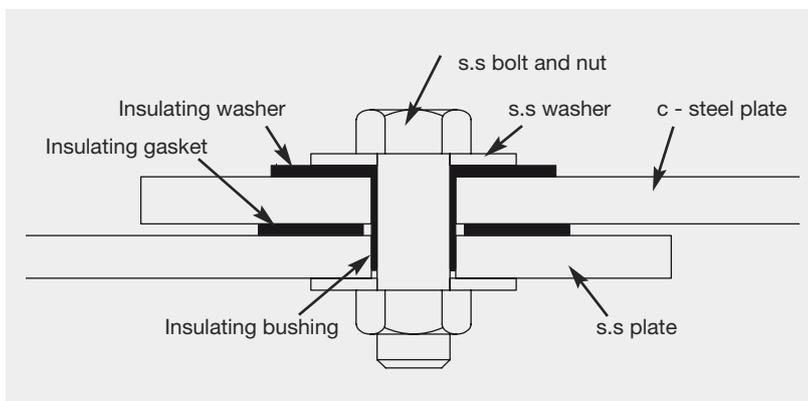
Insulating washers used to prevent galvanic corrosion in a bolted joint. (14)
